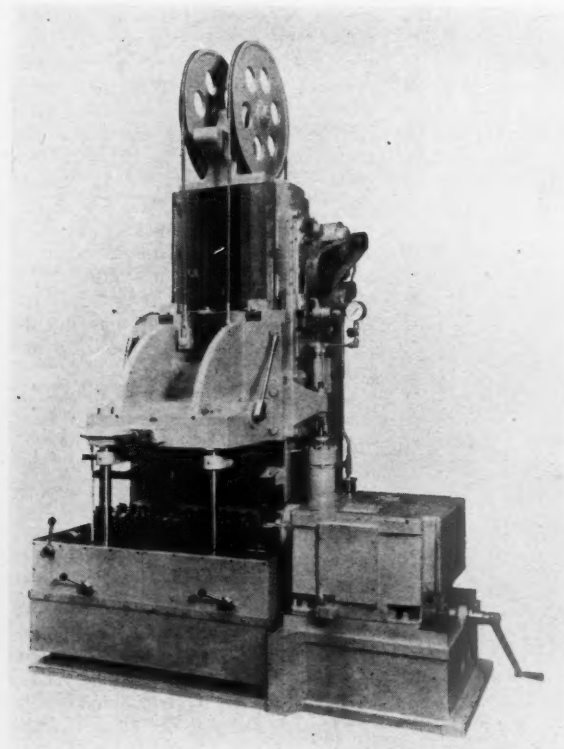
A special Archdale milling machine with 20 cutters for machining bearing faces and lock tag slots.
